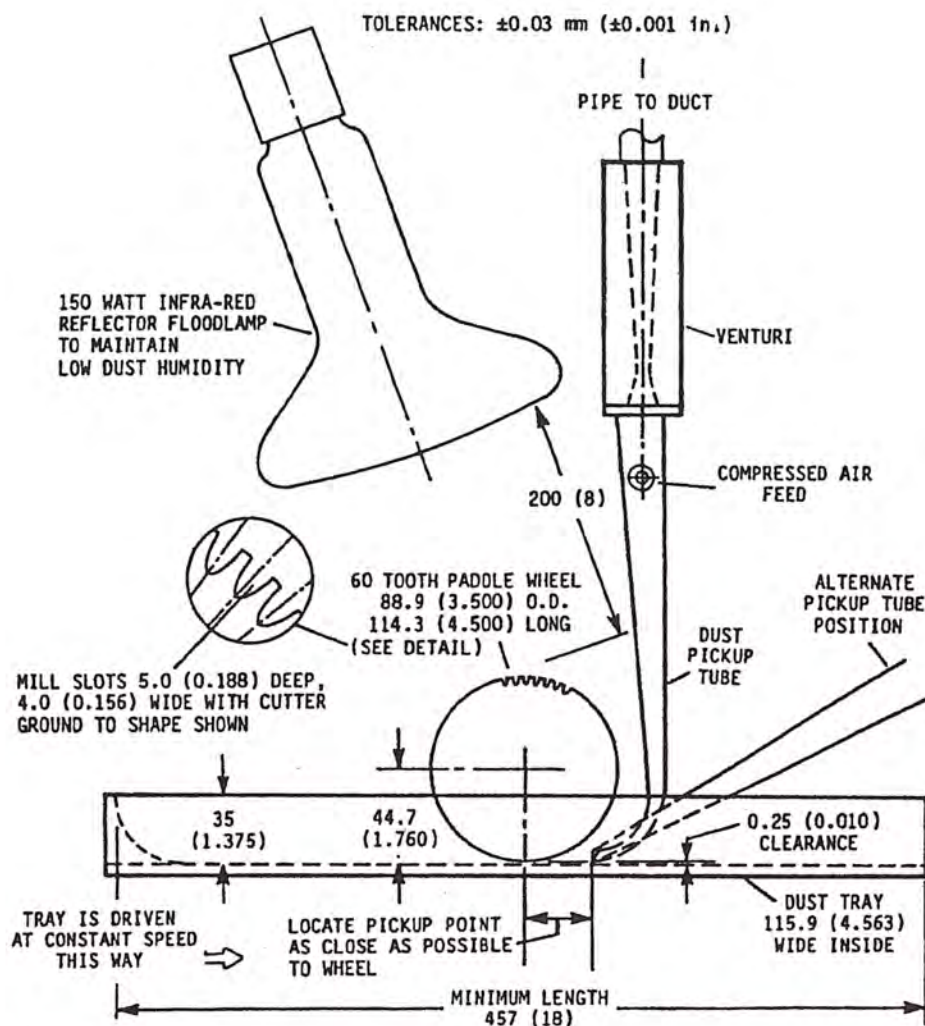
Critical dimensions of dust feeder assembly. Dimensions are in mm (in.).
